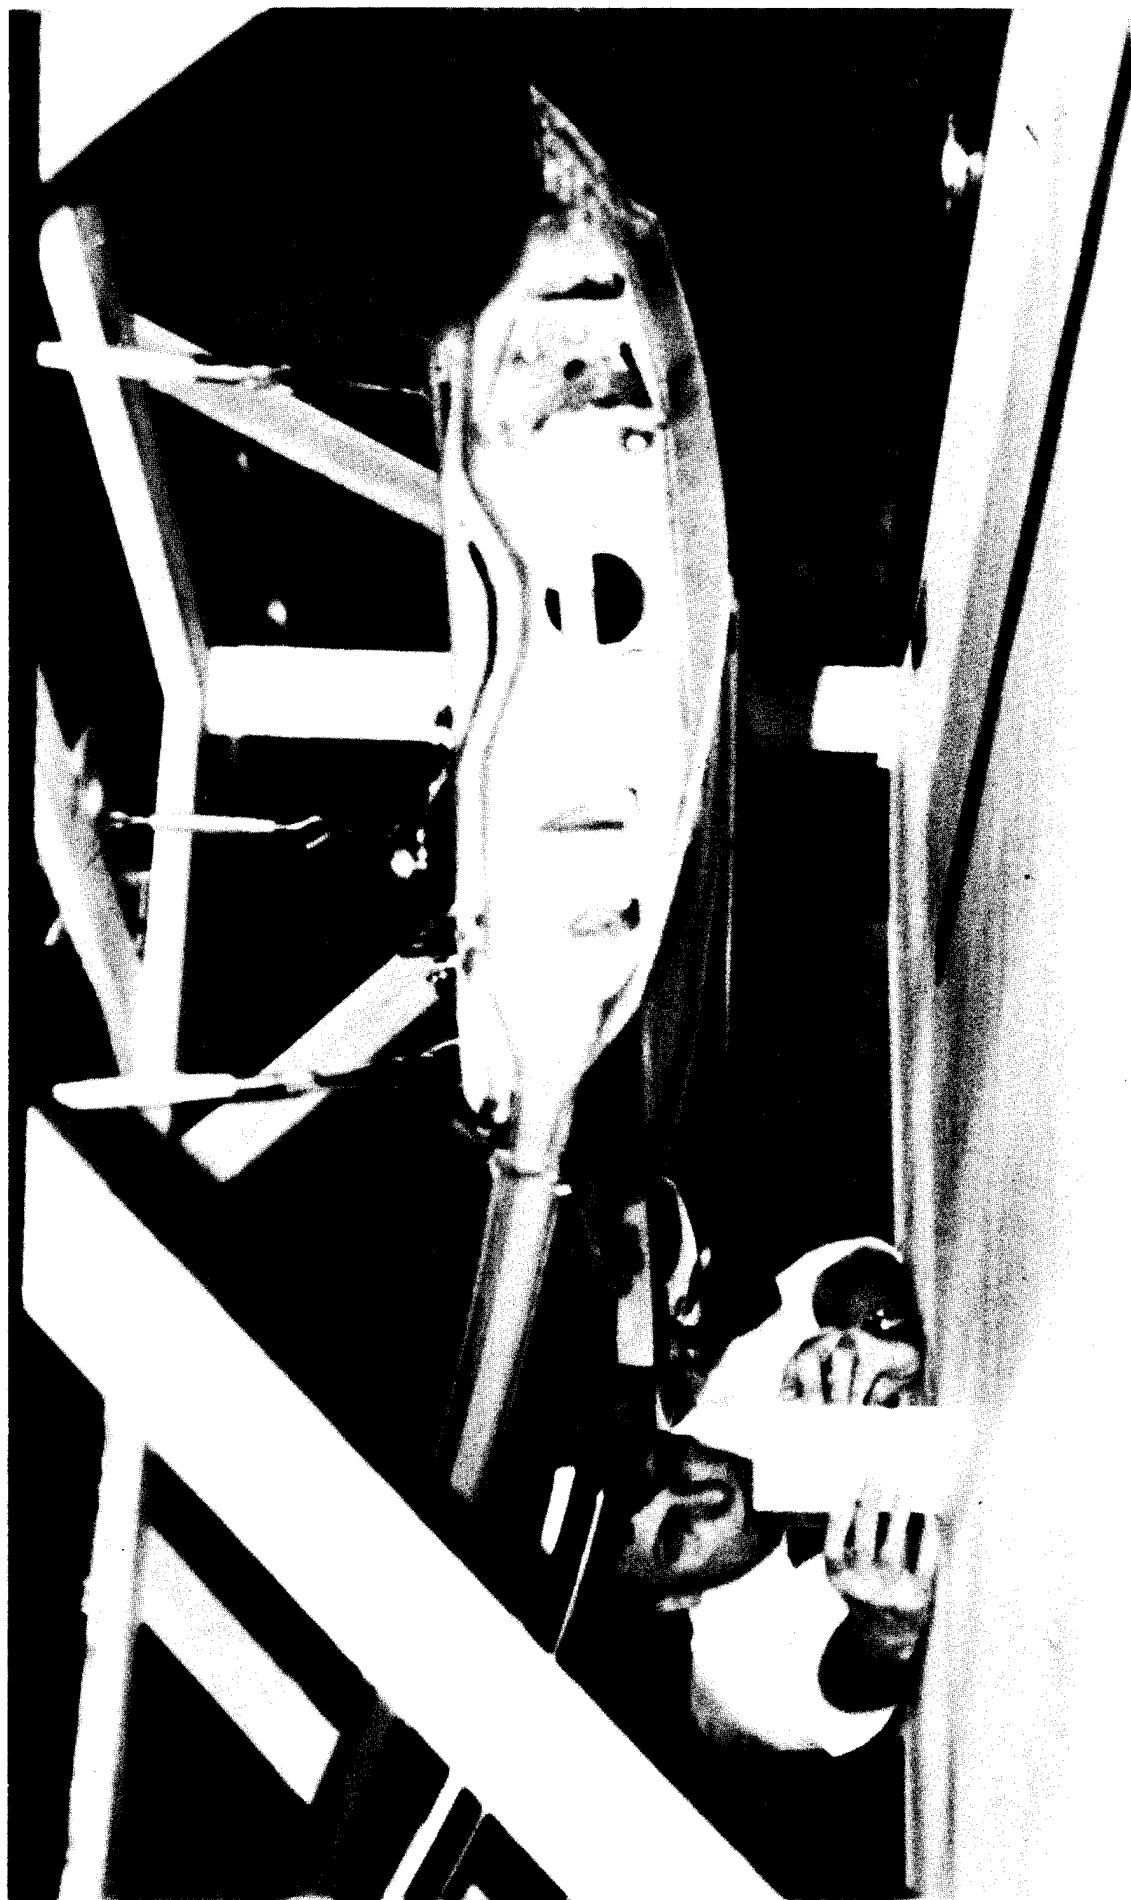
TOOLING AIDS USED TO OBTAIN IMPALA DOOR DIMENSIONS
